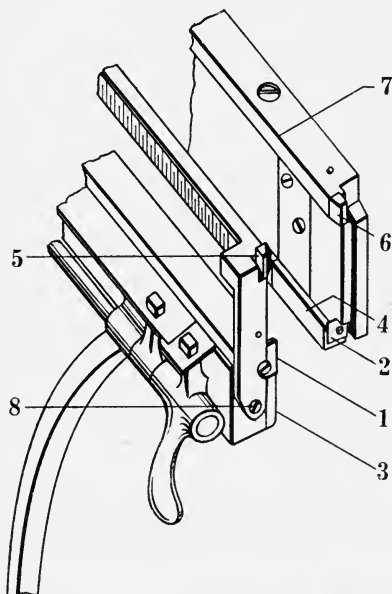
Section of the Assembling Elevator, shown in perspective end view, which, with the accompanying text, explains the functions and maintenance of the parts indicated. The parts indicated are subjected to severe usage and are designed to resist wear.
